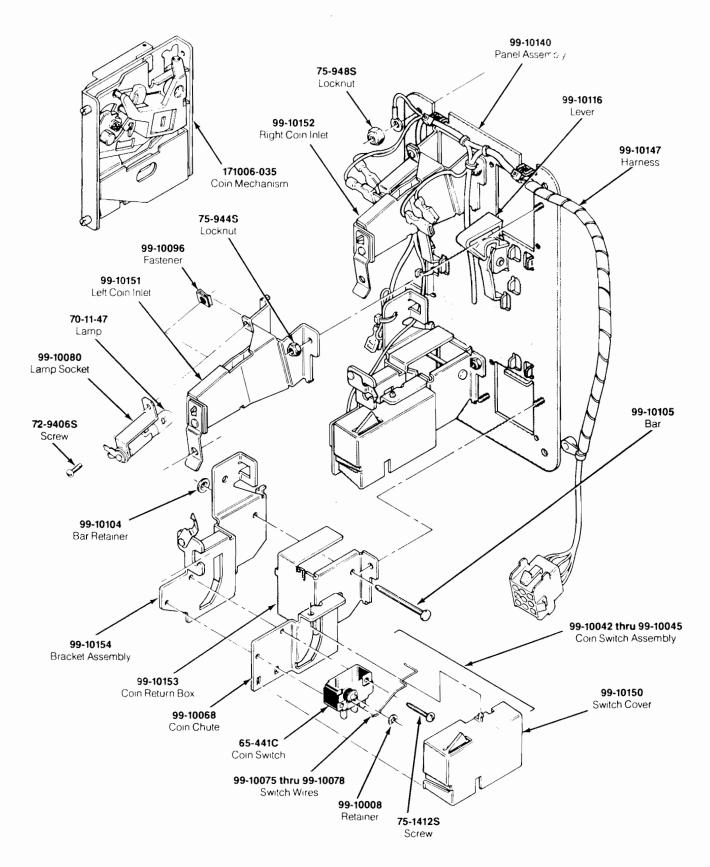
Coin Acceptors, Inc. Coin Door Assembly 171027-001 A
